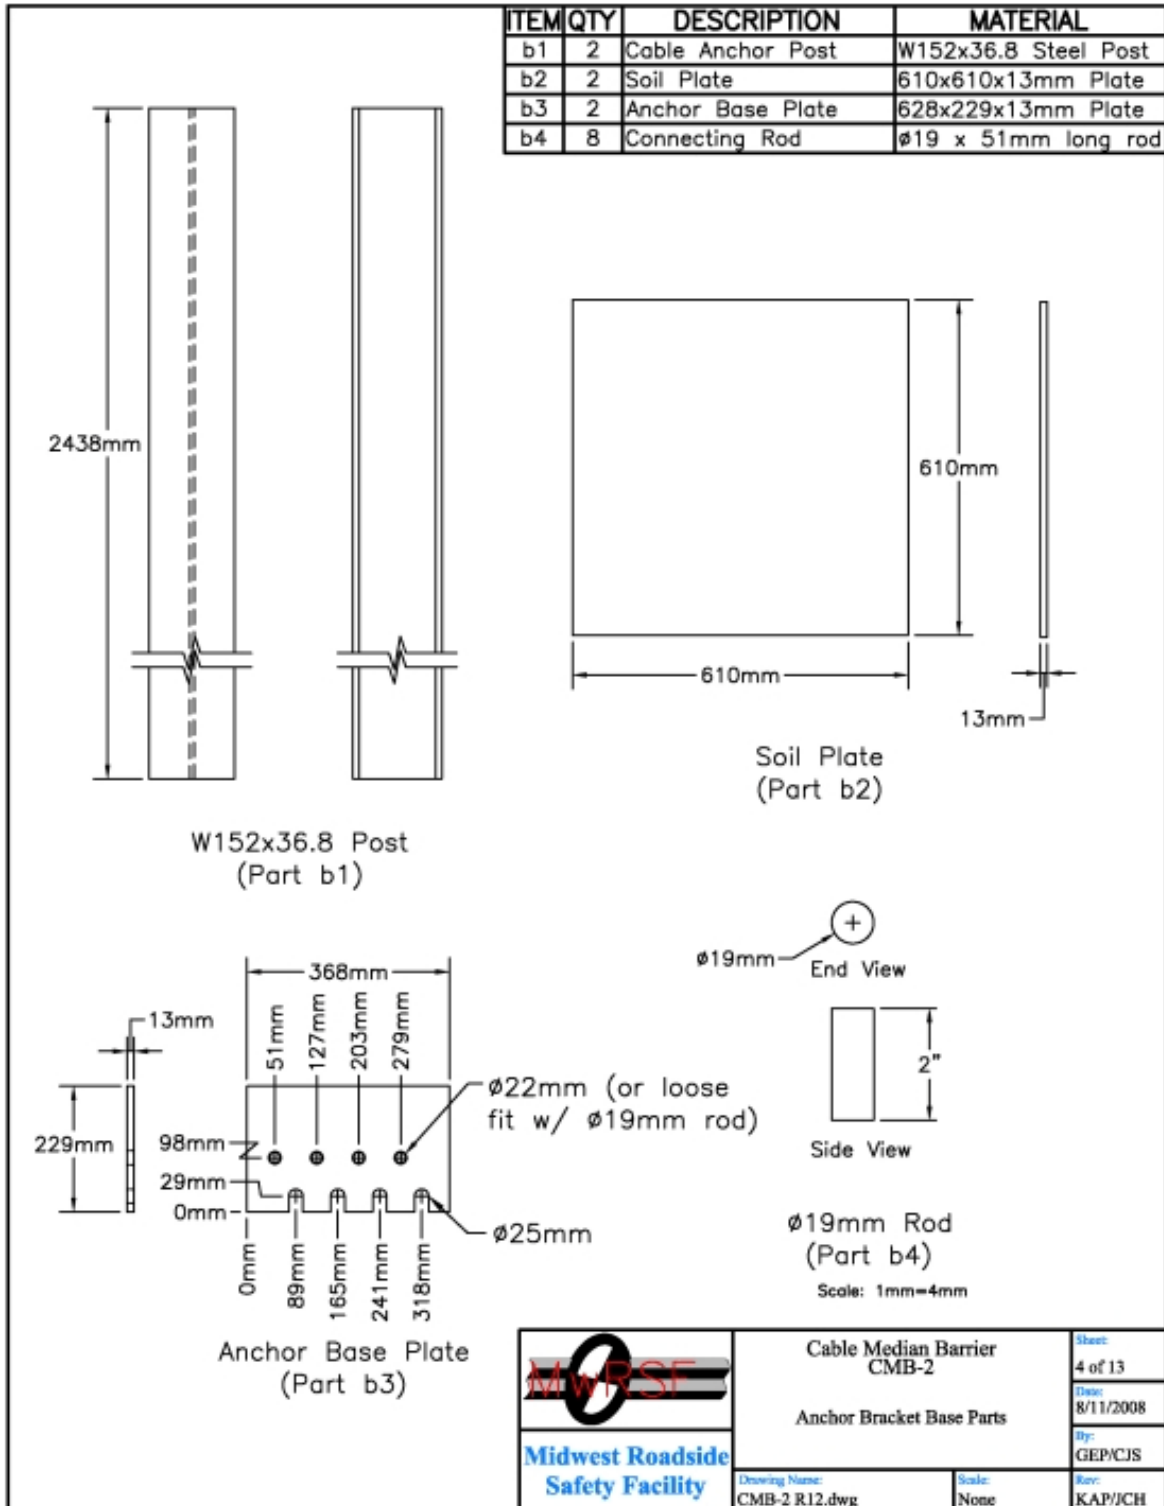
Anchor Bracket Base Parts (Metric), Design No. 2
